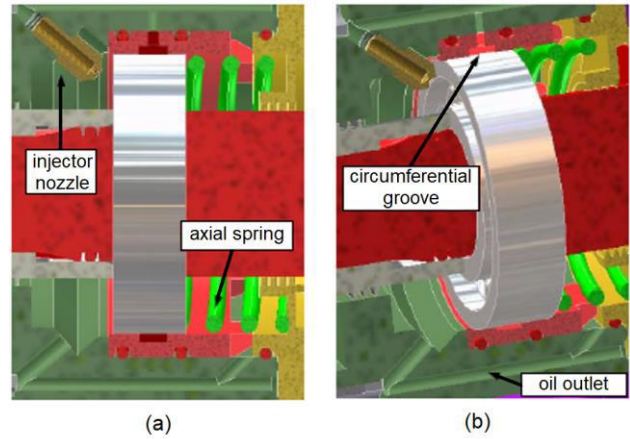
Squeeze film damper used as rear bearing (a) side view; and, (b) perspective view.
